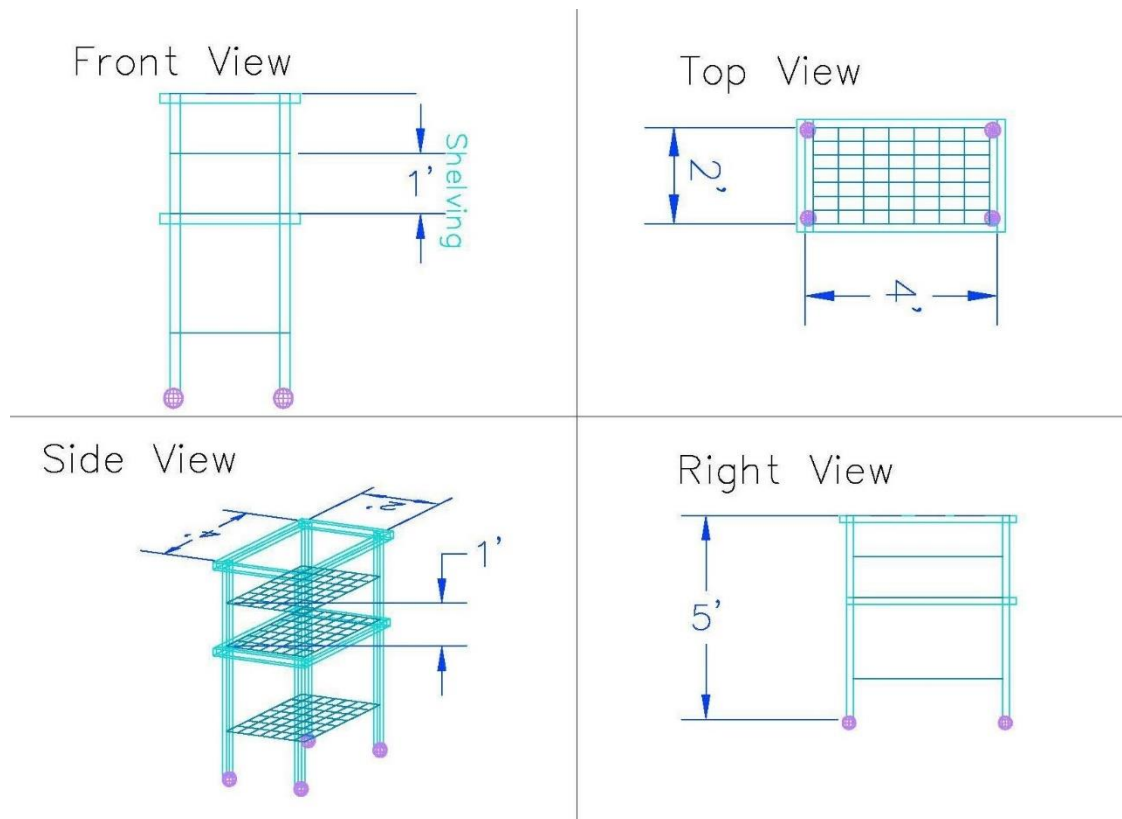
The Starter Box CAD drawing by Julie Hernandez
